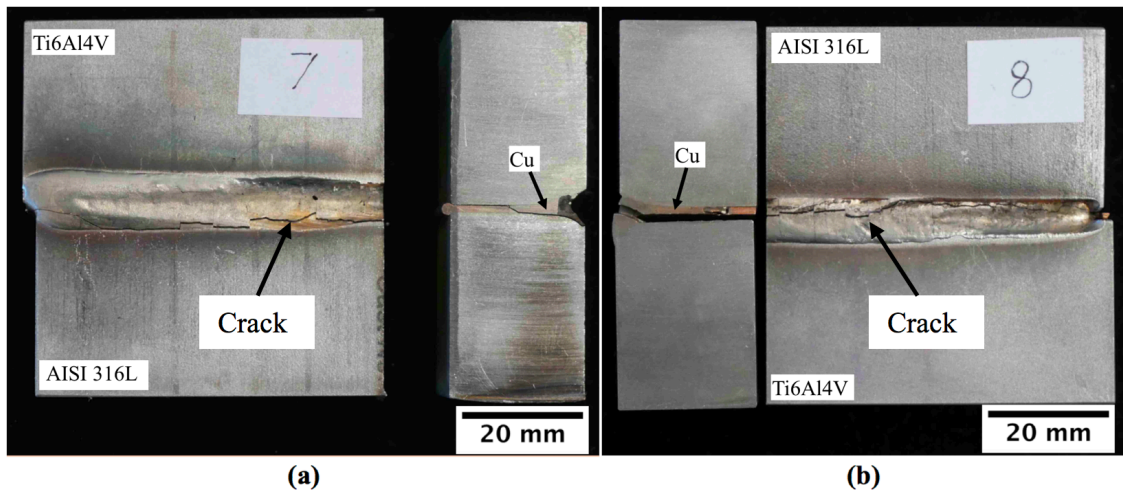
Dissimilar weld surface and cross section (a) weld 7 (b) weld 8.
